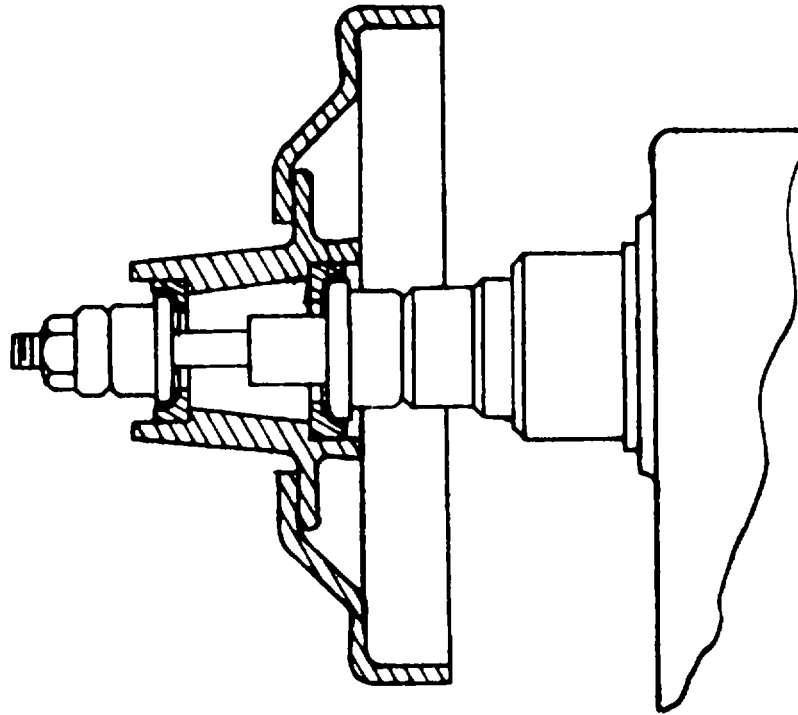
BALL BEARING EQUIPPED HUB
